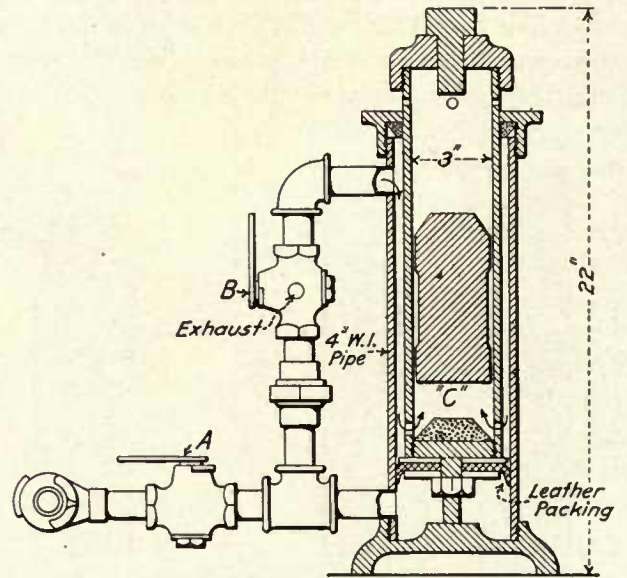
Pneumatic Hammer for Removing Frame Bolts.
